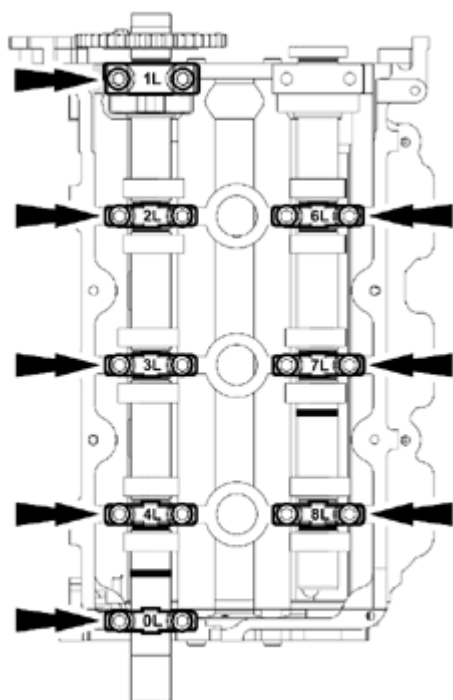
Locating Bolts And Camshaft Oil Seal Retainer
